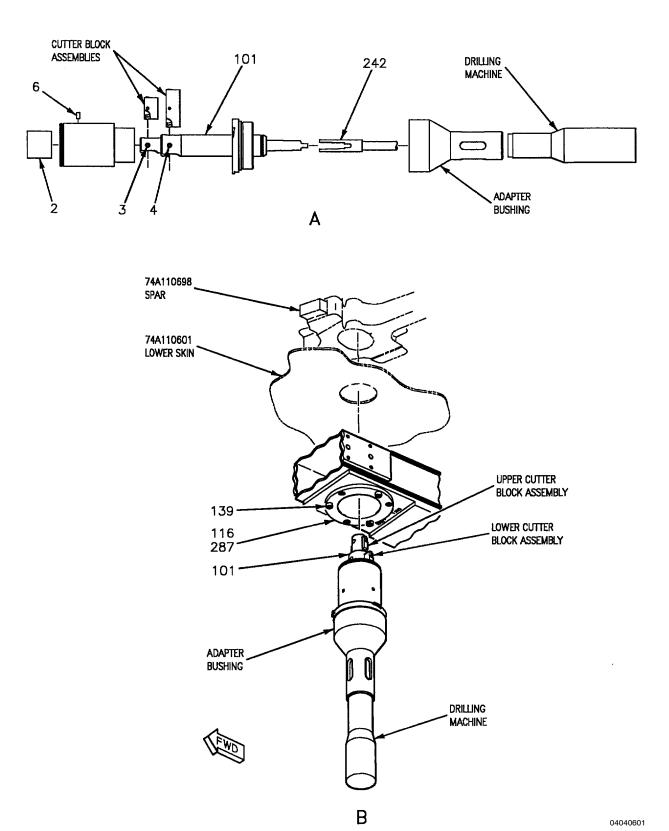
Boring Upper and Lower Skins, Installation and Boring of Outboard Pylon Post Bushing (Sheet 1)
